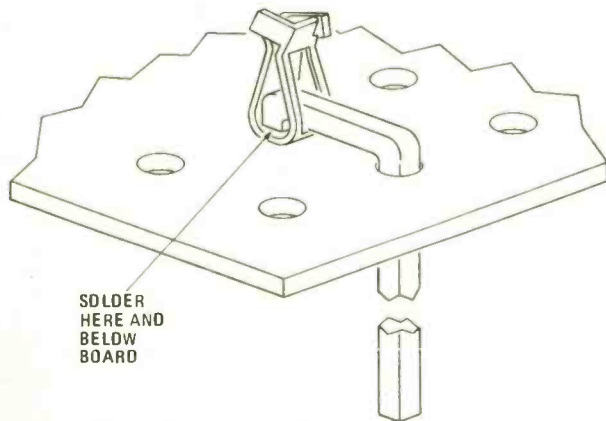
HOW MOLEX SOLDERCON AND VECTOR J-PIN can be united to form one terminal of a socket for an IC.
